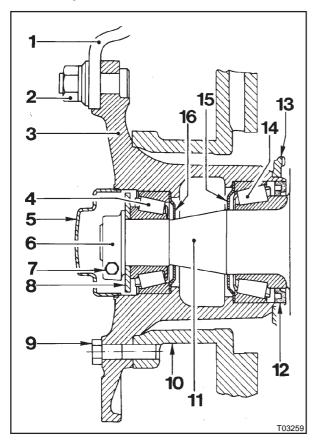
Classic wheel bearing set-up (front and tag axle installation)
